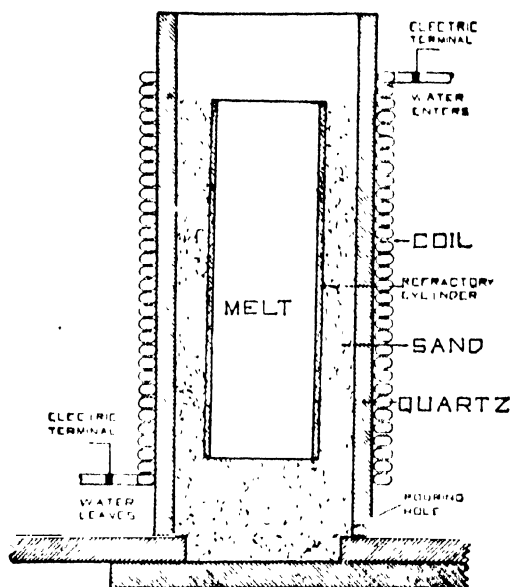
CROSS-SECTIONAL VIEW OF FURNACE FOR MAKING MELTS WITHOUT A CRUCIBLE
